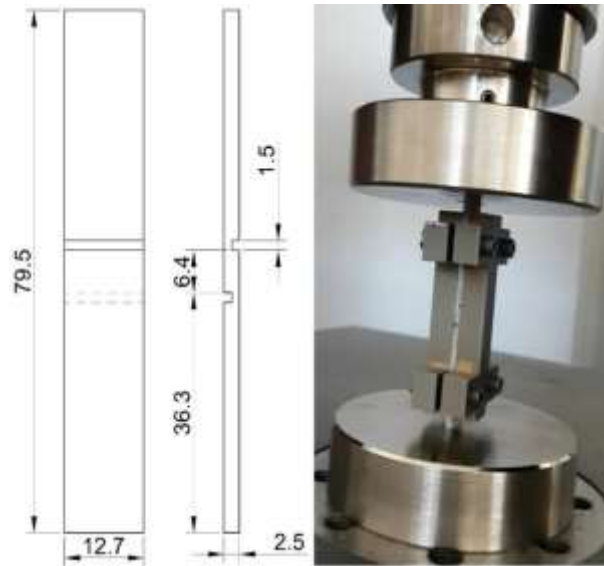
Interlaminar shear test specimen dimensions and anti-buckling fixture
